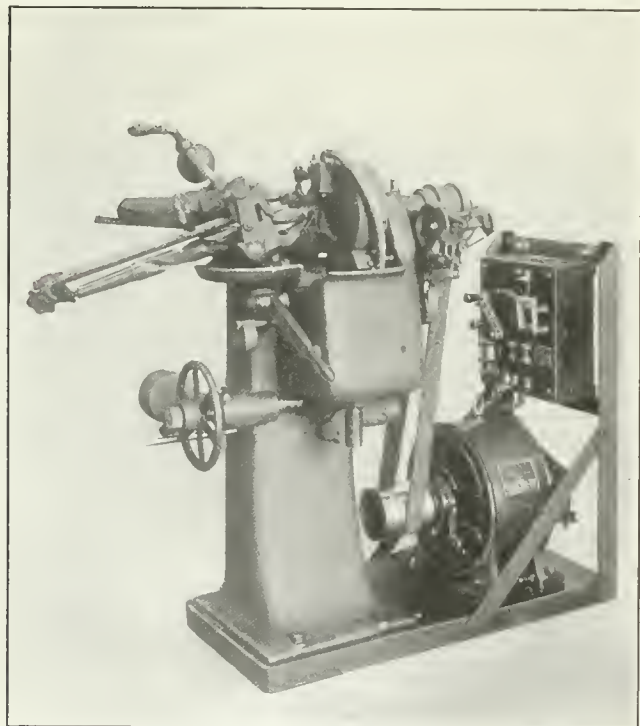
Drill Grinder with Specially-constructed Support for Starter
